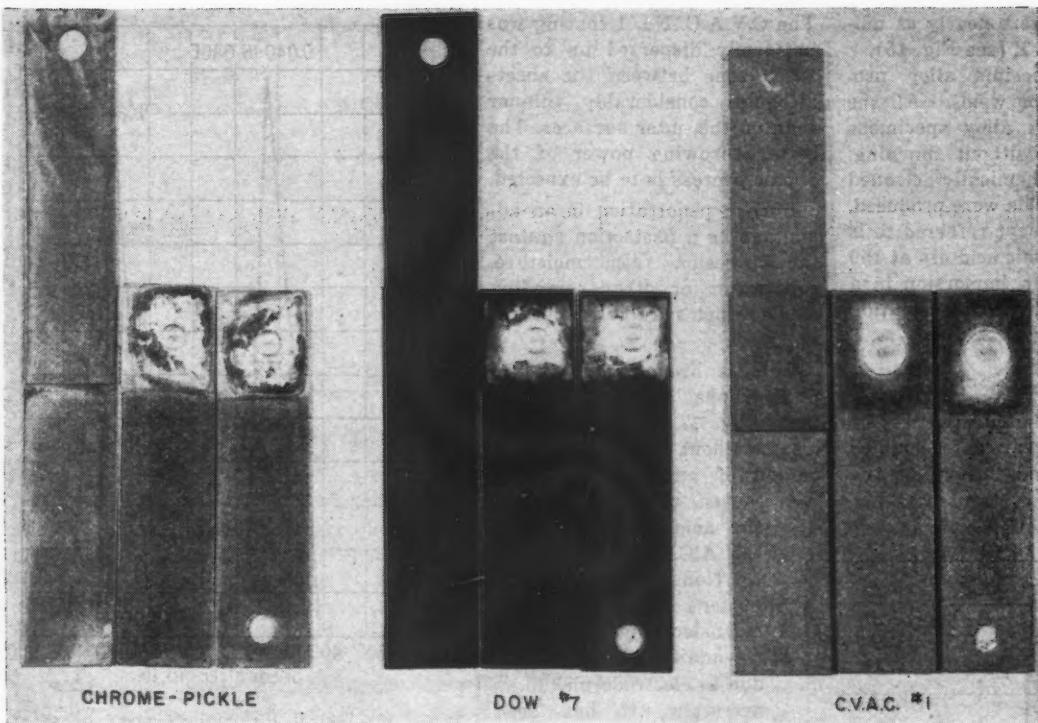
Comparative penetration of three protective chemical finishes applied after spot welding AMC52S-H magnesium alloy sheets.
